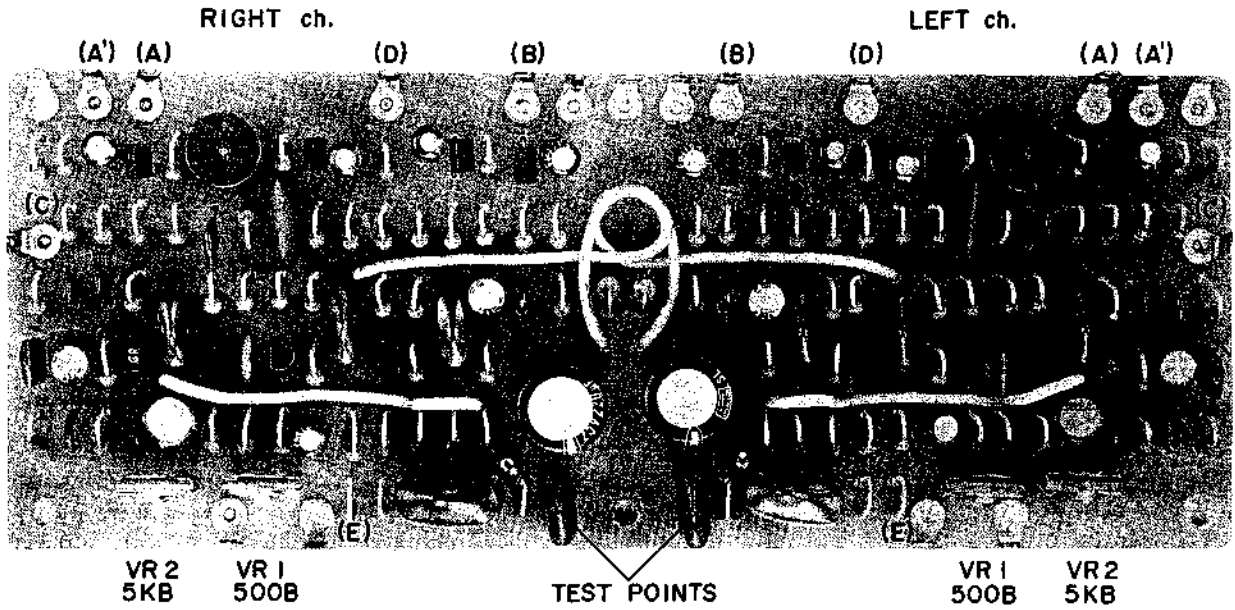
DOLBY N.R. P.C. BOARD TD-5301 (Front Side)
